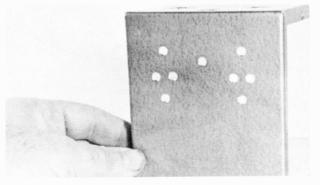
Rear view of the chassis shows two holes near the top edge for PI and P2; four in a horizontal row for JIa, JIb, J2a, and J2b; the two bottom holes are for battery connectors J3 and J4. 5-1, you can see three controls: (1) toggle switch S1 for turning battery power on and off; (2) a variable control to the right of the switch, R1a-R1b, for controlling volume; and (3) a control to the left of S1 which is the dual tone control, R2a-R2b. Fig. 5-5 is a rear view of the completed amplifier. Clearly shown are the metal-jacketed audio input jacks (P1a and P1b). The row of four connectors (J1a-J2a-J1b-J2b) provide the output connections for the loudspeakers. The bottom row of connectors (J3 and J4) are for the battery. When connecting the battery to the amplifier, polarity must be strictly observed. Different colored connectors for J3 and J4 aid in avoiding misconnections in polarity; red or orange is the usual color for the positive (+) terminal and black or white can be used for the negative (-) terminal.
